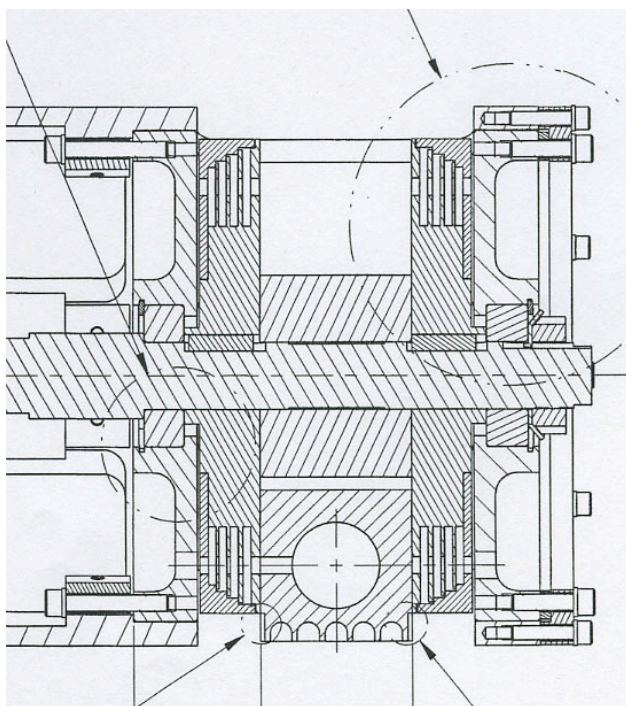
Design drawing of cross-flow region in endstation flanked by baffled rotors. One of the primary goals in designing and fabricating the test units was to verify that we could achieve a gap spacing of $\approx 0.001''$ between these components.
